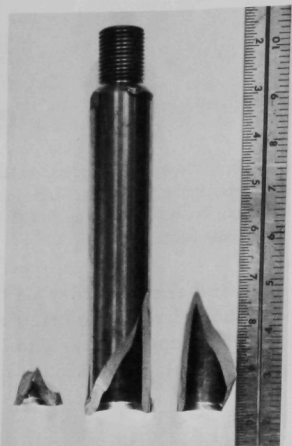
Shattered Cylinder of Lead-cutting Tool for Instrumented Subassemblies
